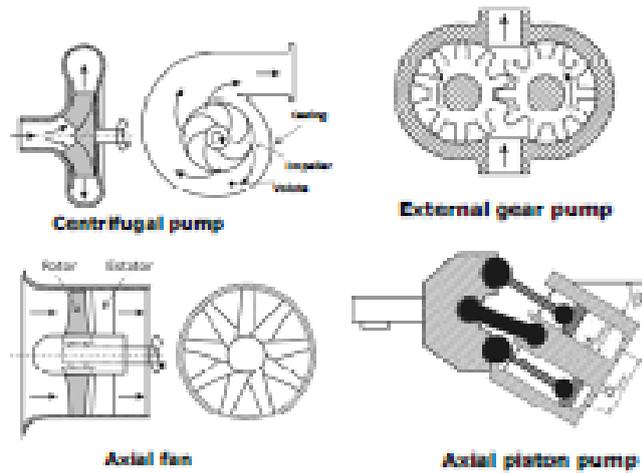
Examples of positive displacement machines and turbomachines (Pérez, J. G., 2010)
